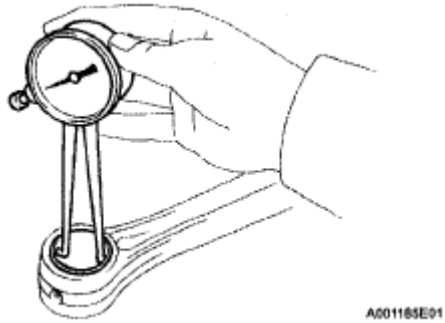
Identifying Connecting Rod Small End Bore Diameter
